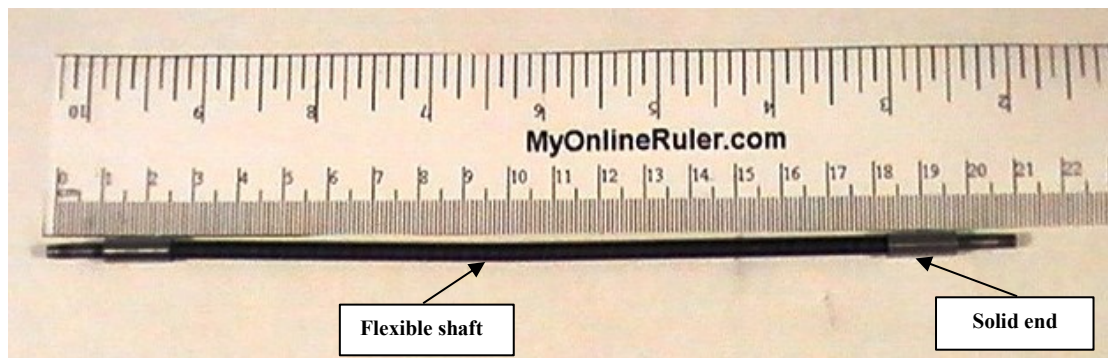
The flexible shaft that used in the construction of the flexible probe. The flexible part of the shaft is attached from the both ends with solid parts that used to be attached with the drill and drill bit.
